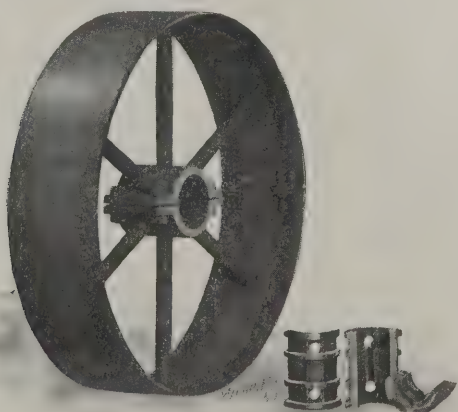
Six-arm Single Latshaw Steel Pulley.
